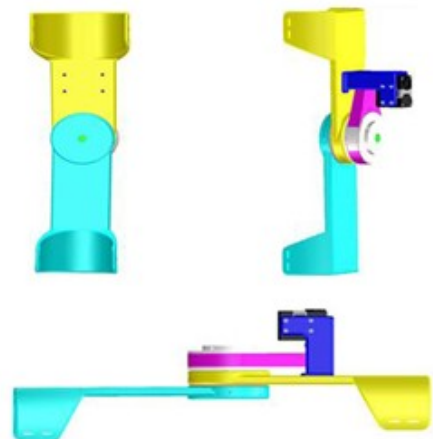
CAD model of an active elbow orthosis with a gear-belt reduction gear
